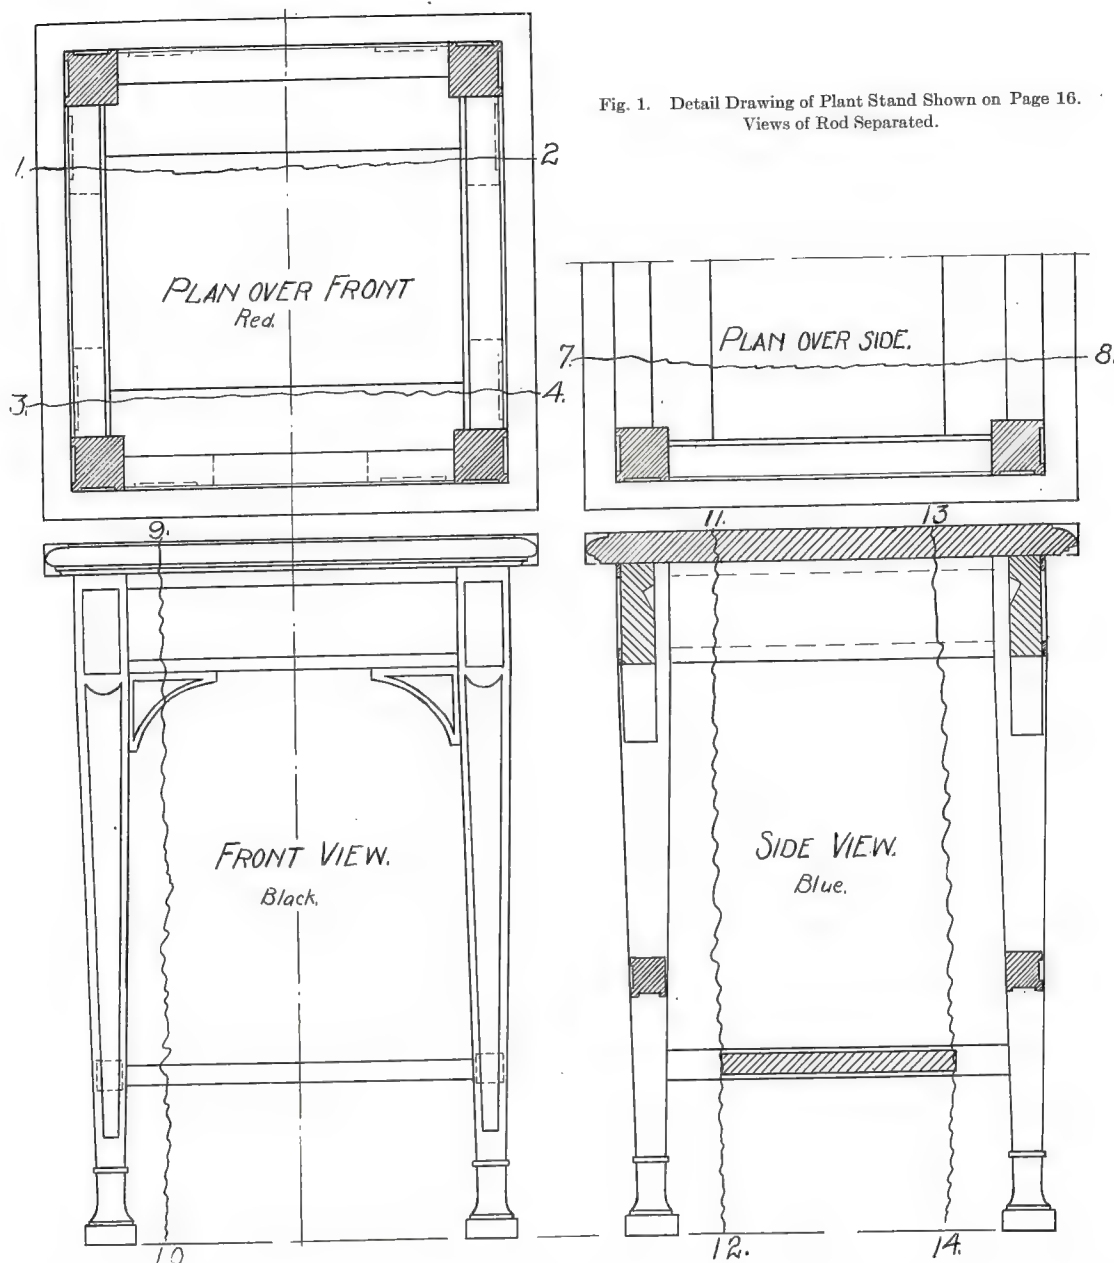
Detail Drawing of Plant Stand Shown on Page 16.
